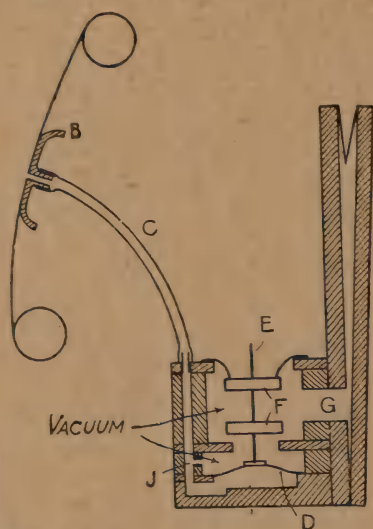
Section of Player-piano Single-pneumatic with Hole Open
